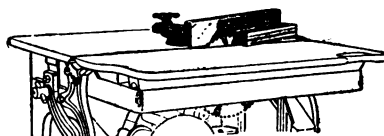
shows the manner of hollowing Core Boxes, Staves, Mouldings, etc.
